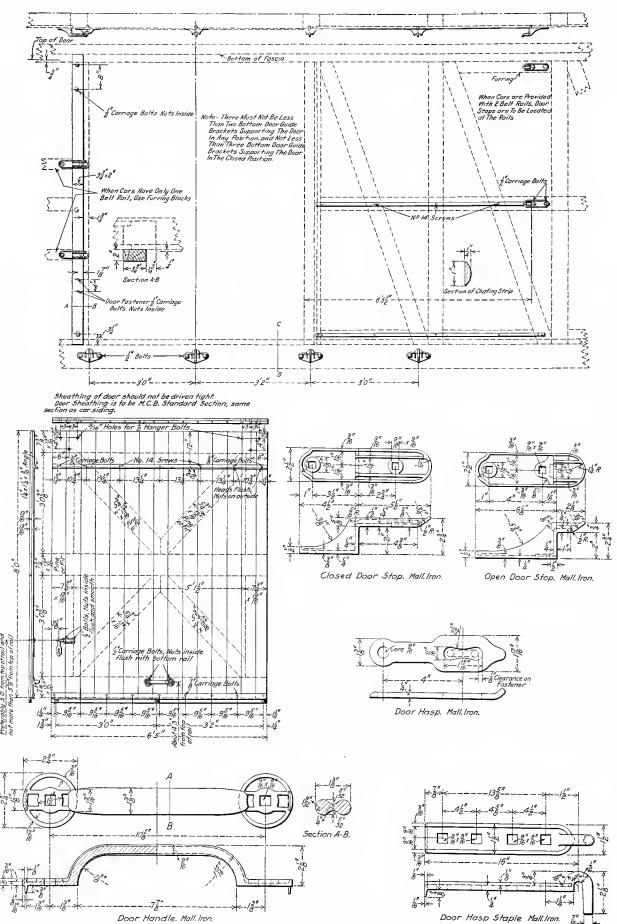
M. C. B. Standard Outside Hung Box Car Side Door and Details. (M. C. B. Sheet 30.) See also Fig. 2746.
